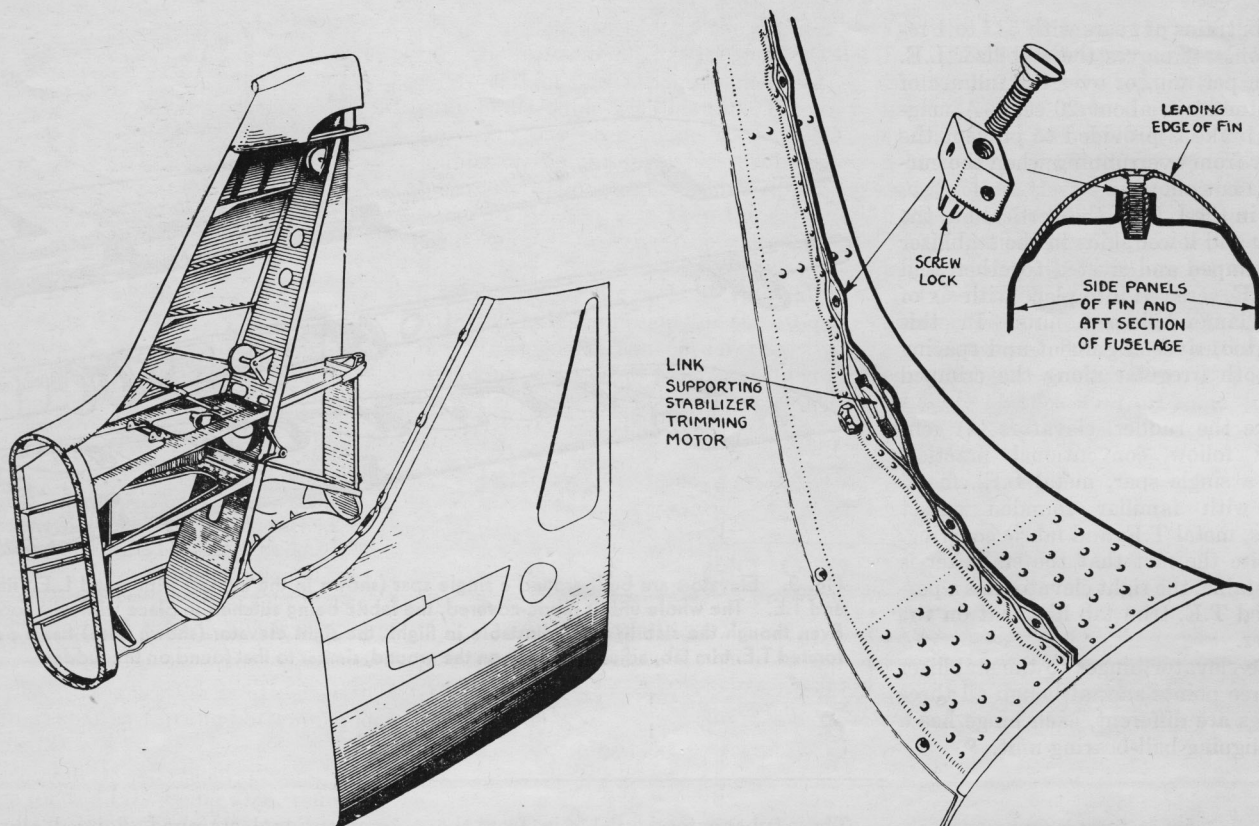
Cutaway view (left) of the empennage and integral vertical fin. This section bolts to the aft fuselage section at bulkhead 14. The diagonal structural member is the heart of this section, for it supports tail-wheel loads when the craft is on ground and supports fin, rudder, stabilizer, and elevator loads when the ship is air-borne. Two skins, extending from the bottom of the fuselage to the top horizontal rib at the base of the fin tip, are riveted together at the top along a vertical flange. Aft of the diagonal member and above the middle horizontal rib, the skins are of "waffle" construction. A hinged inspection door, 30 in. high by 15 in. across its base, is locked in place by special screw-driver-operated fasteners. The piano hinge and springs are protected by fabric covering. The sketch (above) gives details of the fin L.E., showing how two skins are riveted together along the vertical flange. Single formed-aluminum alloy fairing is fastened over the flange by flush screws driven into diamond-shaped safety nuts riveted between flanges. The same method is used for the L.E. of the stabilizer.
